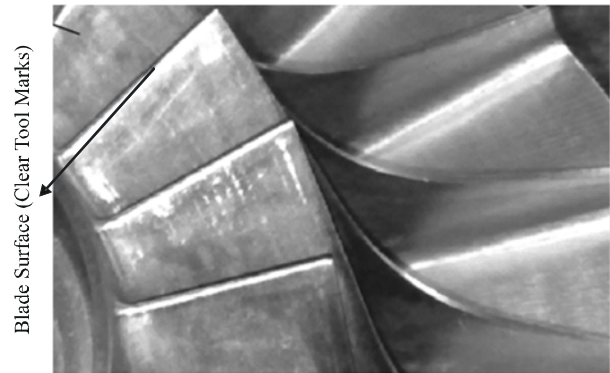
MACHINED COMPONENT BY MANUAL POSITIONING METHOD
